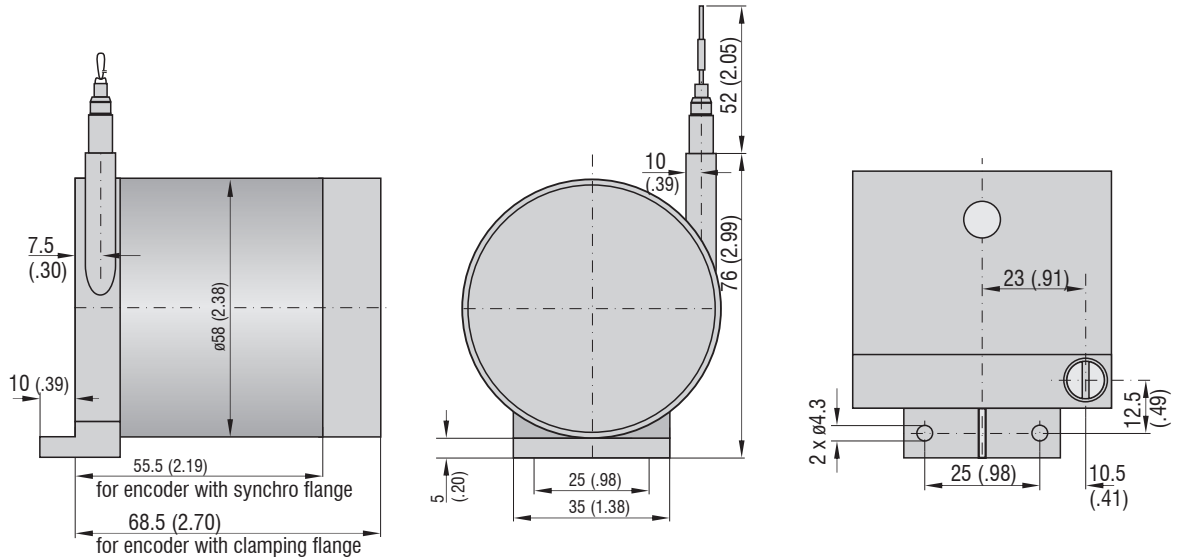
Dimensional drawing of WDS-Z60-M series, dimensions in mm (inches)
